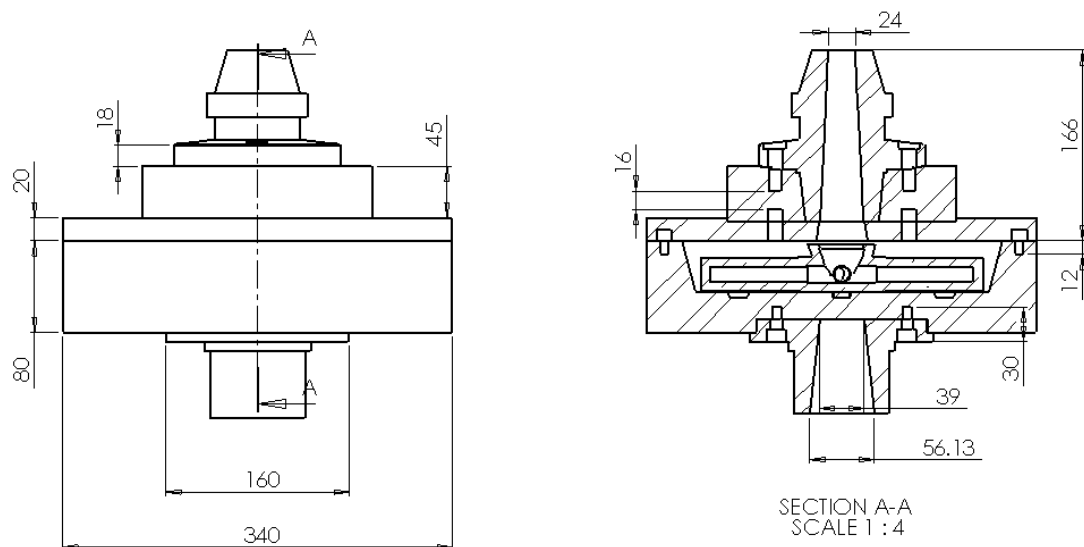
CAD drawing and sectional view of the overall steel die, showing general part dimensions.
